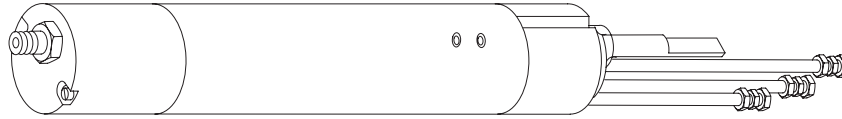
Remotely Actuated Circulating A16A Inside Stripe Gun
